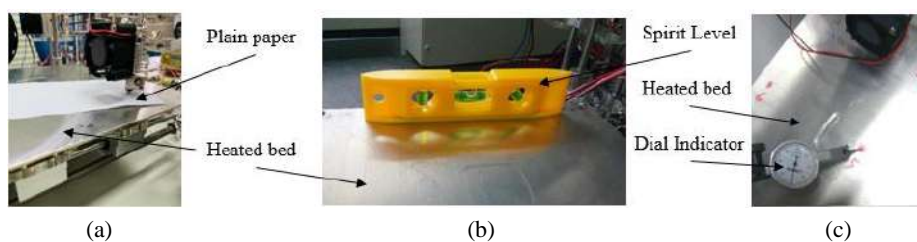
(a) Levelling method using plain paper, (b) using sprit level tool, (c) using dial indicator
